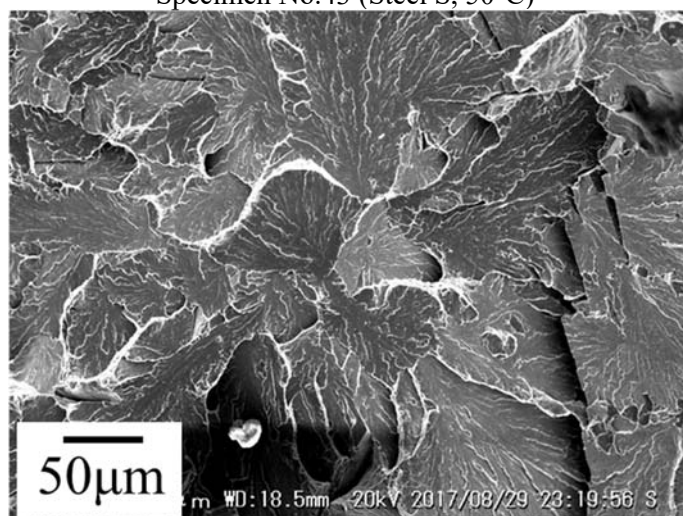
Fracture surface around fracture initiation site (Steel S).
